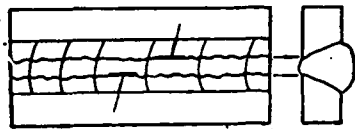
Incomplete fusion at root in one-sided welding
